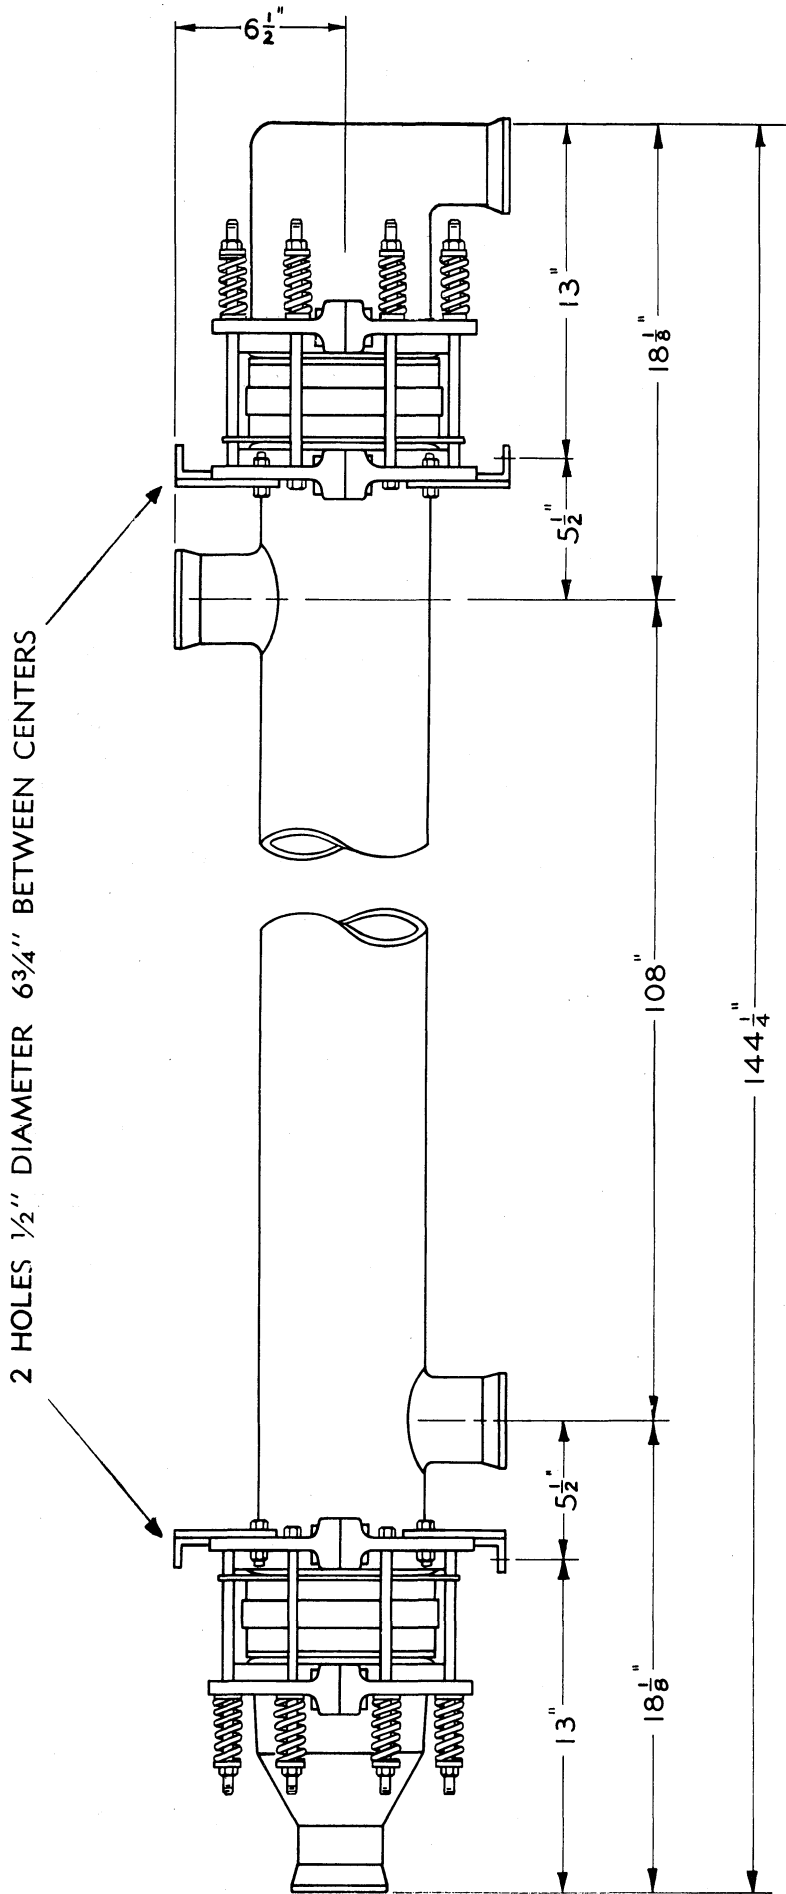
The glass heat exchanger (courtesy Corning Glass Works)
